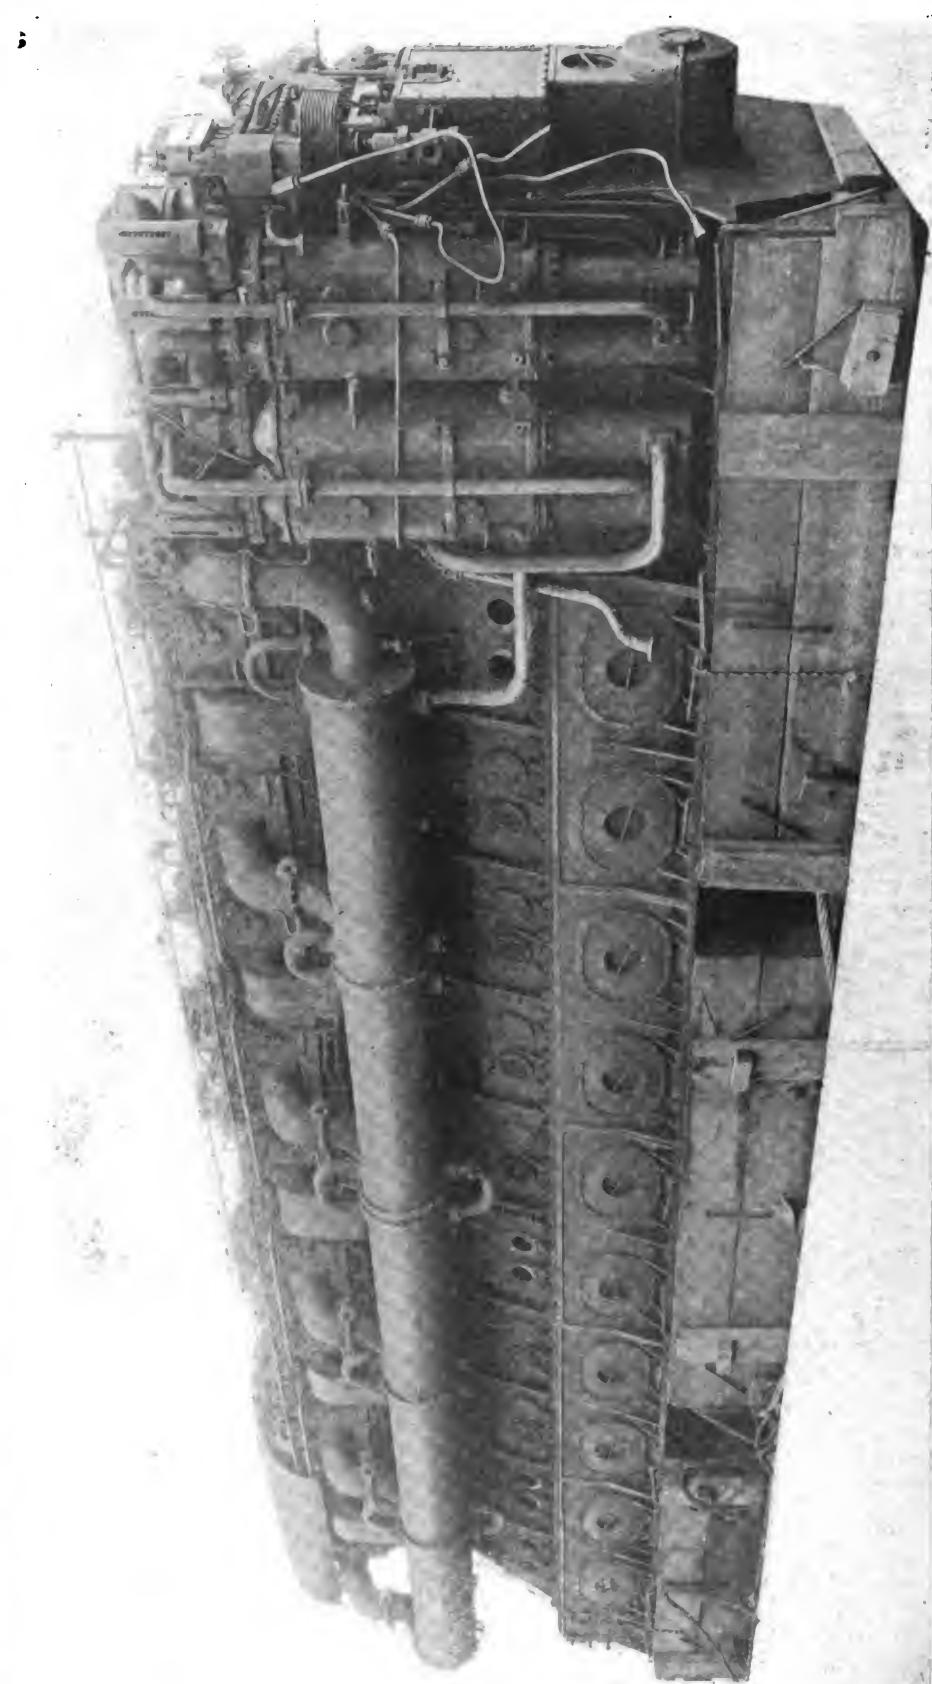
Back view of the big Augsburg Diesel engine, showing exhaust header with sections for each two cylinders, also at right, intercoolers in air compressing system.
